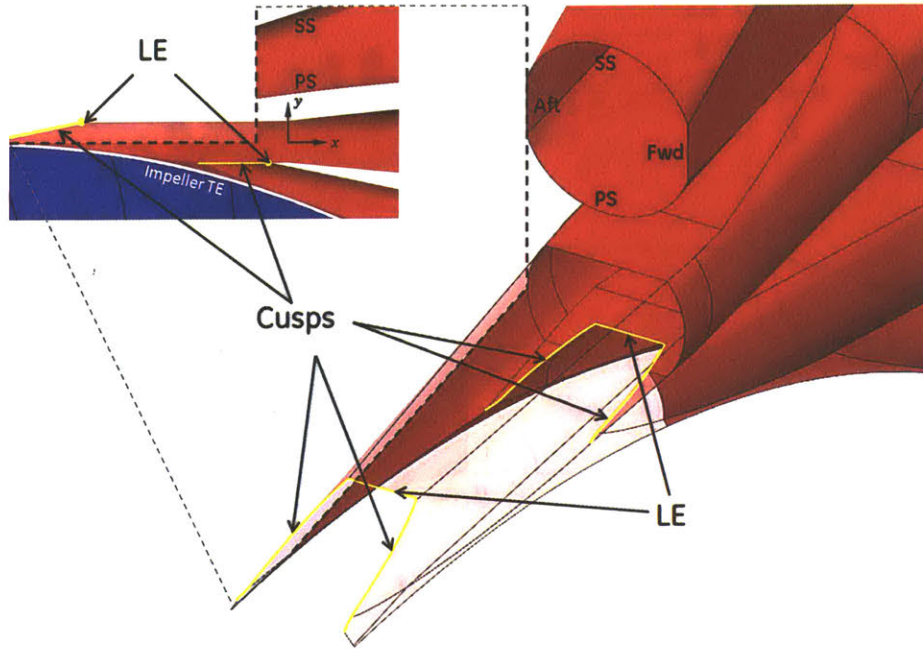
Front and 3D cutaway views of diffuser inlet geometry featuring leading edge cusps.
